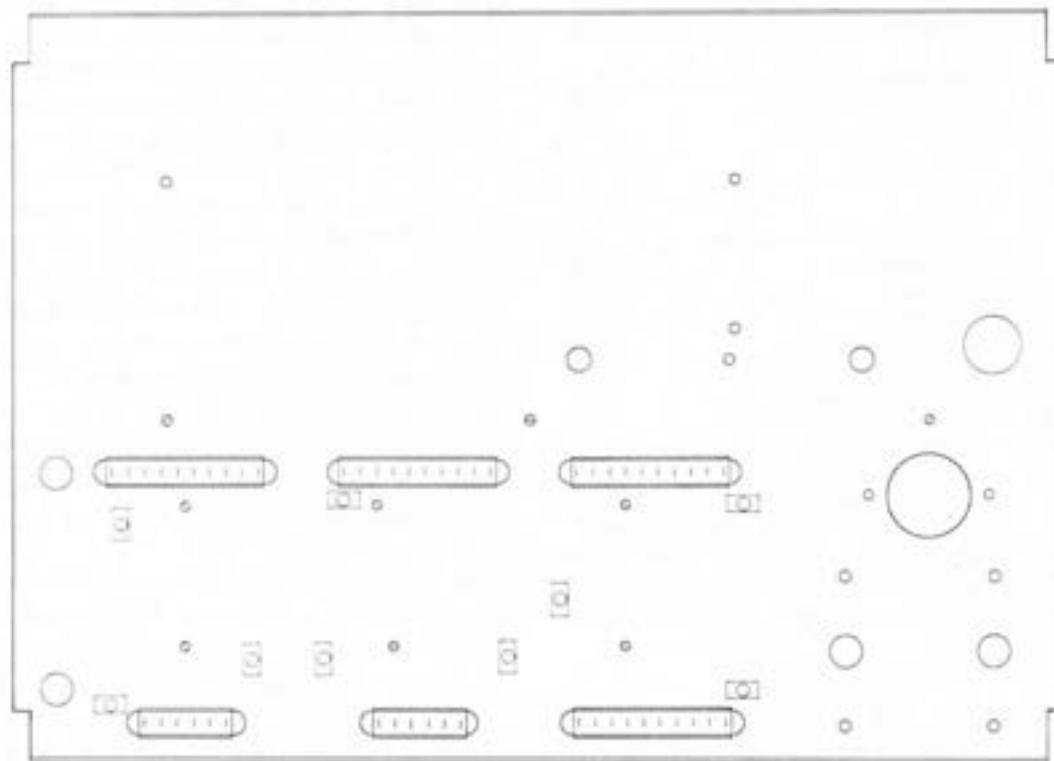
Mounting the circuit board standoffs on the circuit board side of the chassis.
